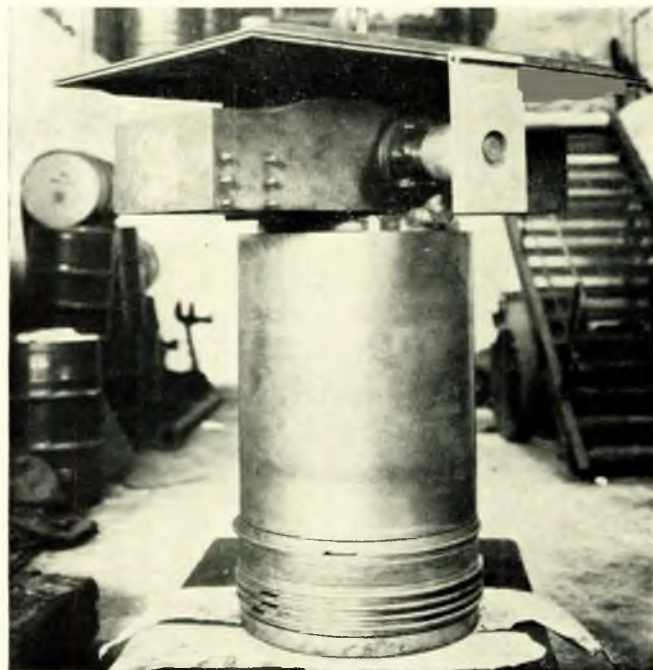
Upper piston, transverse beam and scavenge piston of the single cylinder engine
